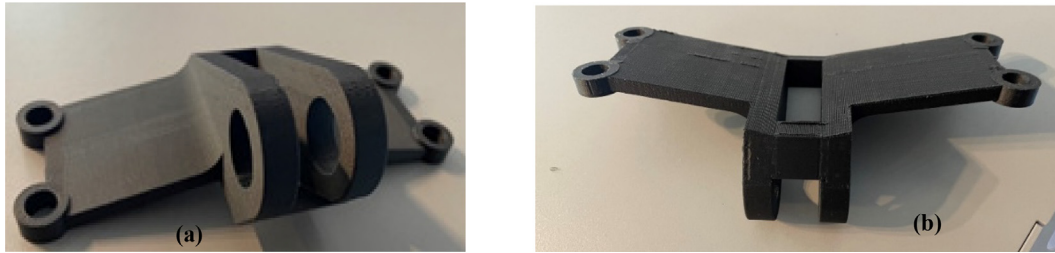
3D printed Optimised Jet Engine Bracket (a) Top View (b) Bottom View.
